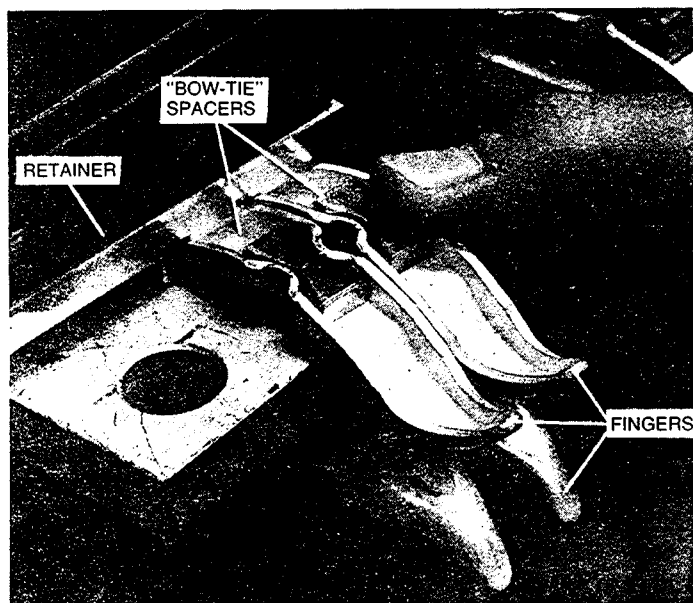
PARTIAL PRIMARY DISCONNECT ASM
